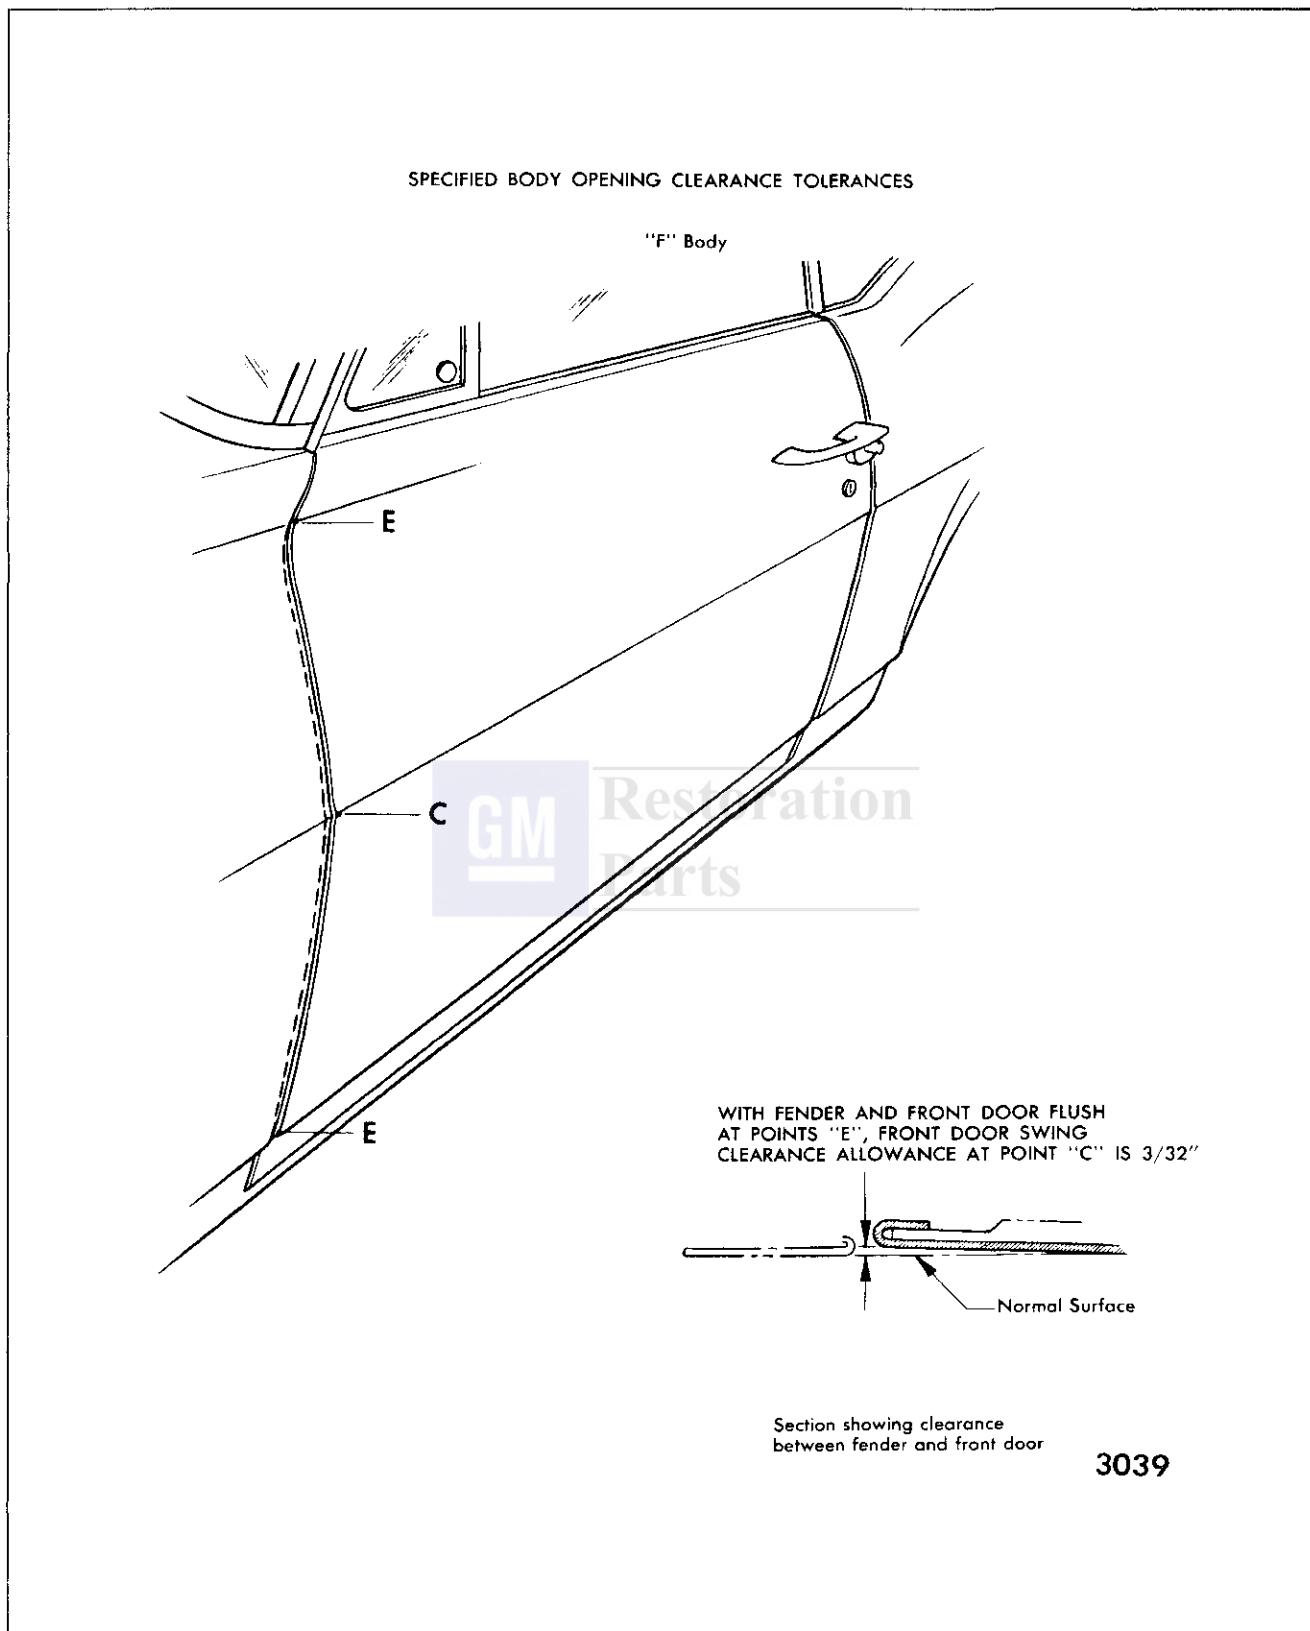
Specified Body Opening Clearance Tolerances - "F" Styles
